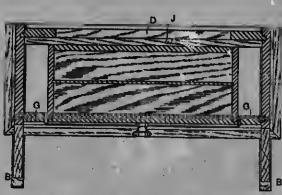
Horizontal Section throug Music Cabinet with Swinging Drawers.
